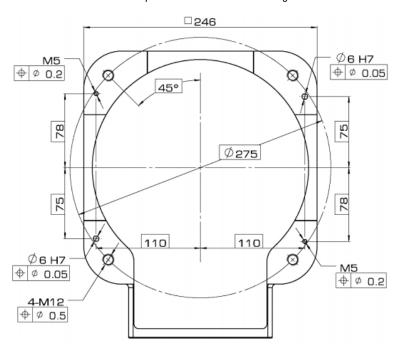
Dimensions of AIR8-710B manipulator base interface
